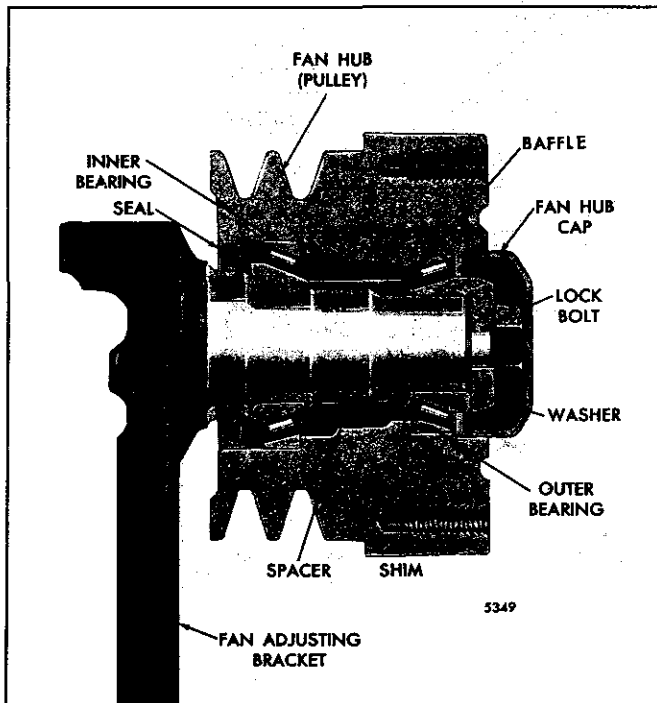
Shaft Type Fan Hub Assembly (6V Engine)
